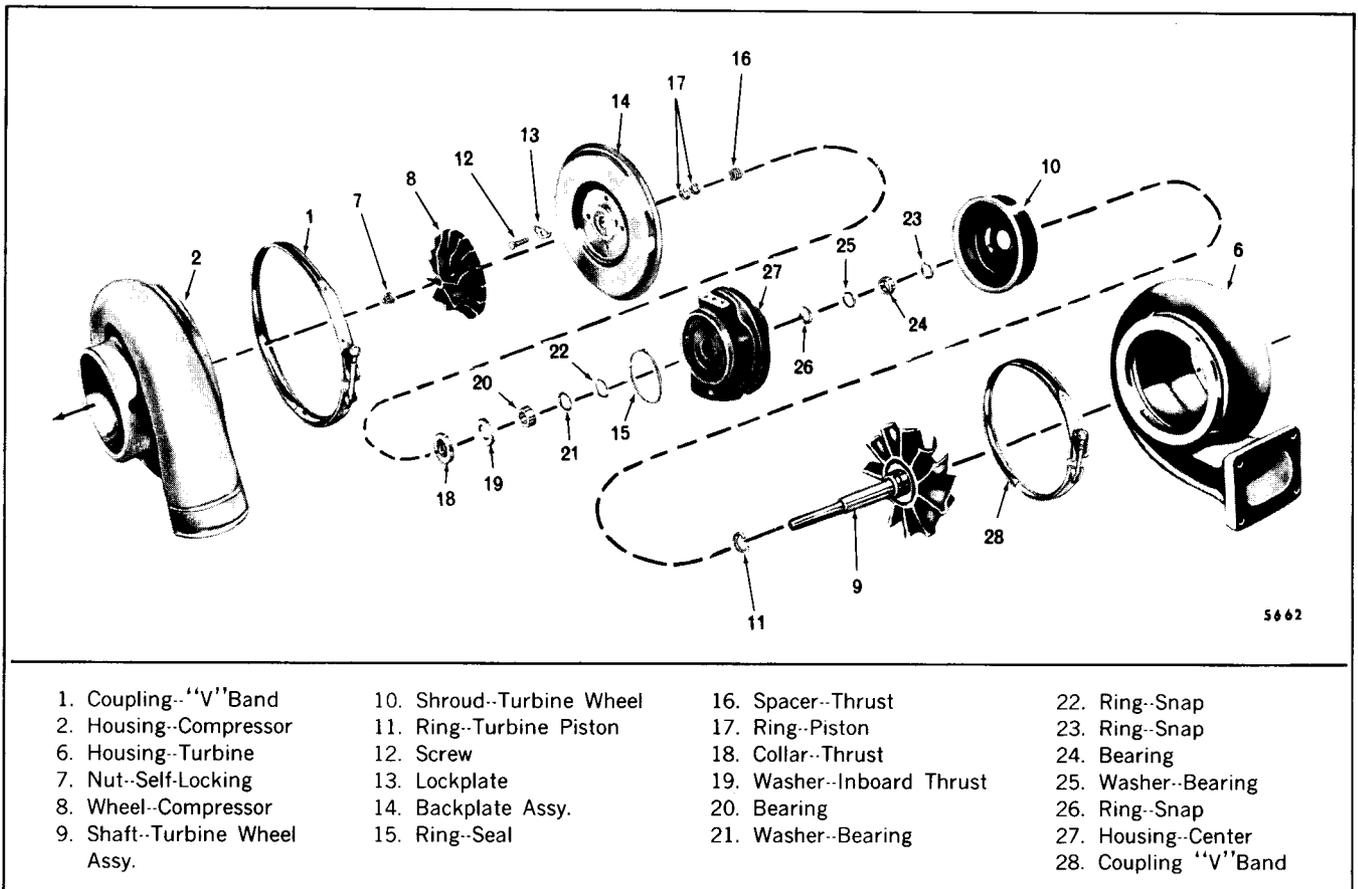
TV61 Turbocharger Details and Relative Location of Parts.
